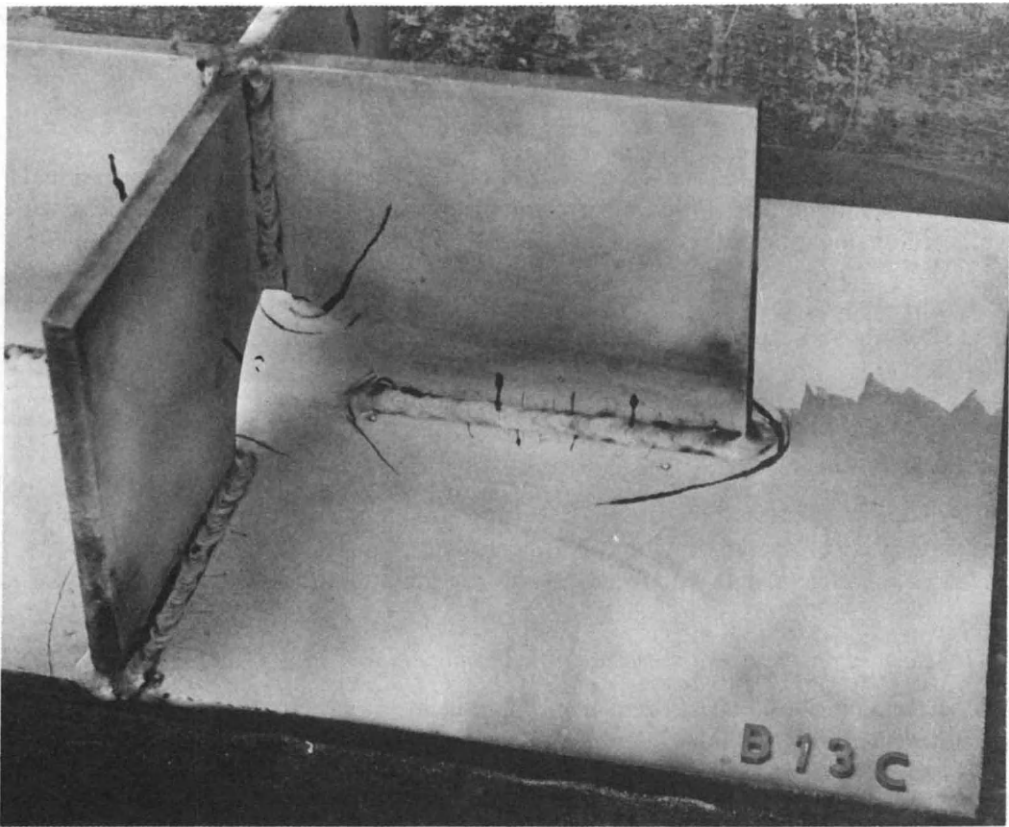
Crack pattern produced by hydrogen-induced cracking technique in a complex-structure specimen made with heat-treated SAE 4340 steel plates (Masubuchi and Martin^(4,42)).
